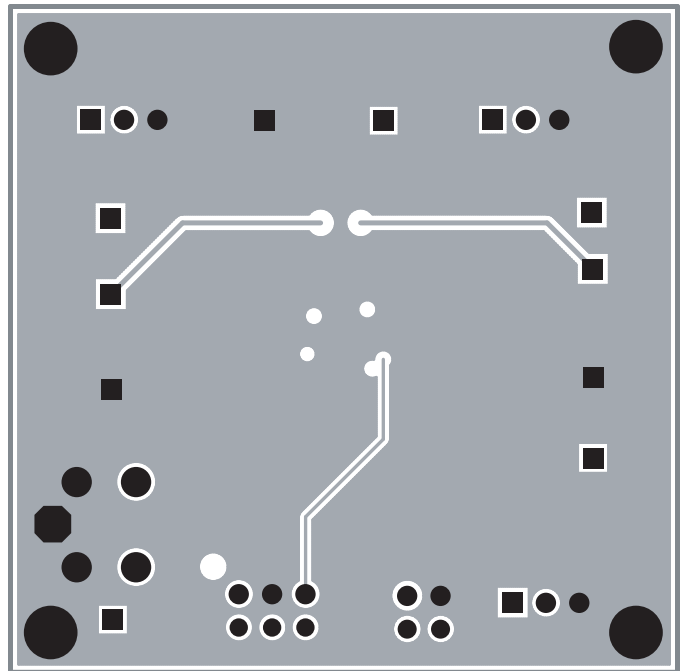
AAT2550 Evaluation Board Layer 2 Layout.
